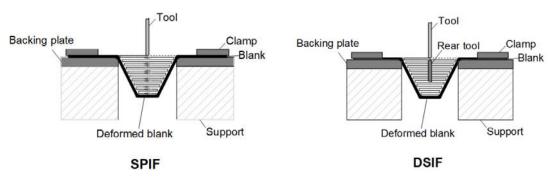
Illustrations of single point (SPIF) and double side incremental forming (DSIF)
